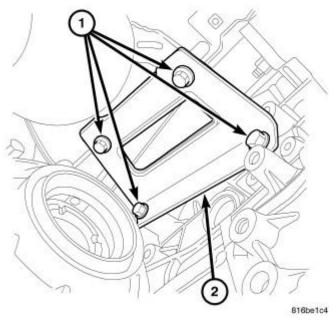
Maniverter To Block Support Bracket & Bolts Courtesy of CHRYSLER GROUP, LLC
